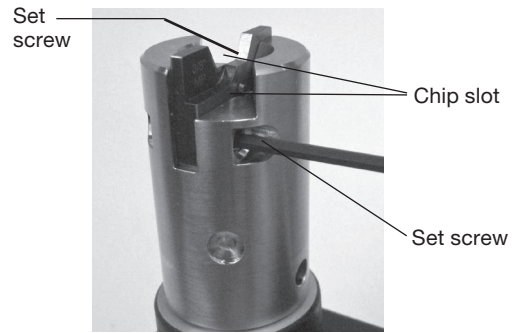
Tighten these #10 set screws then the second pair on opposite side of housing
